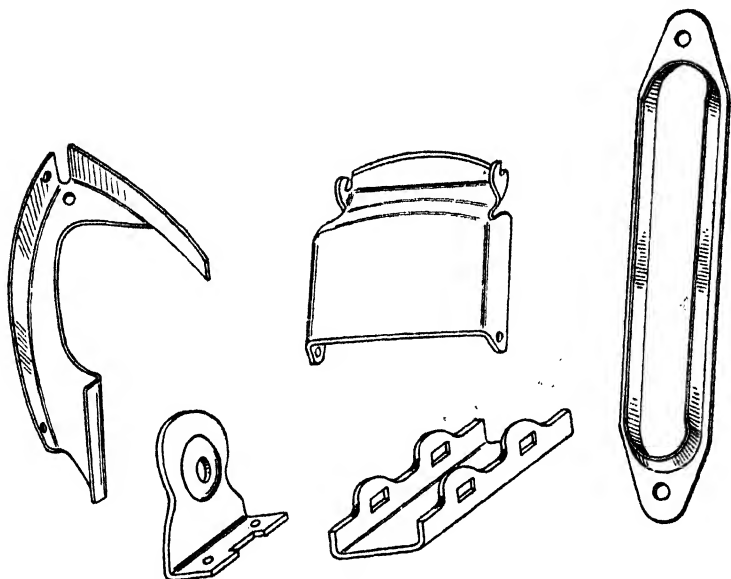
Example of small miscellaneous parts (classification 3) produced by stamping.
